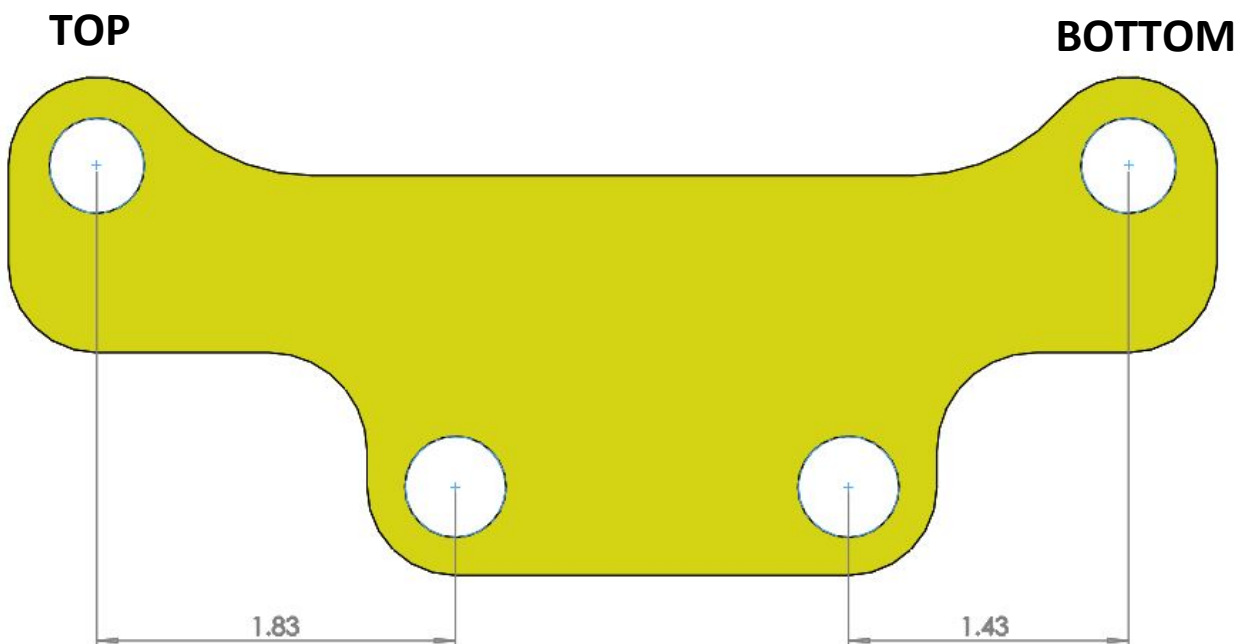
Determining Top and Bottom for Intermediate Caliper Mounting Bracket
